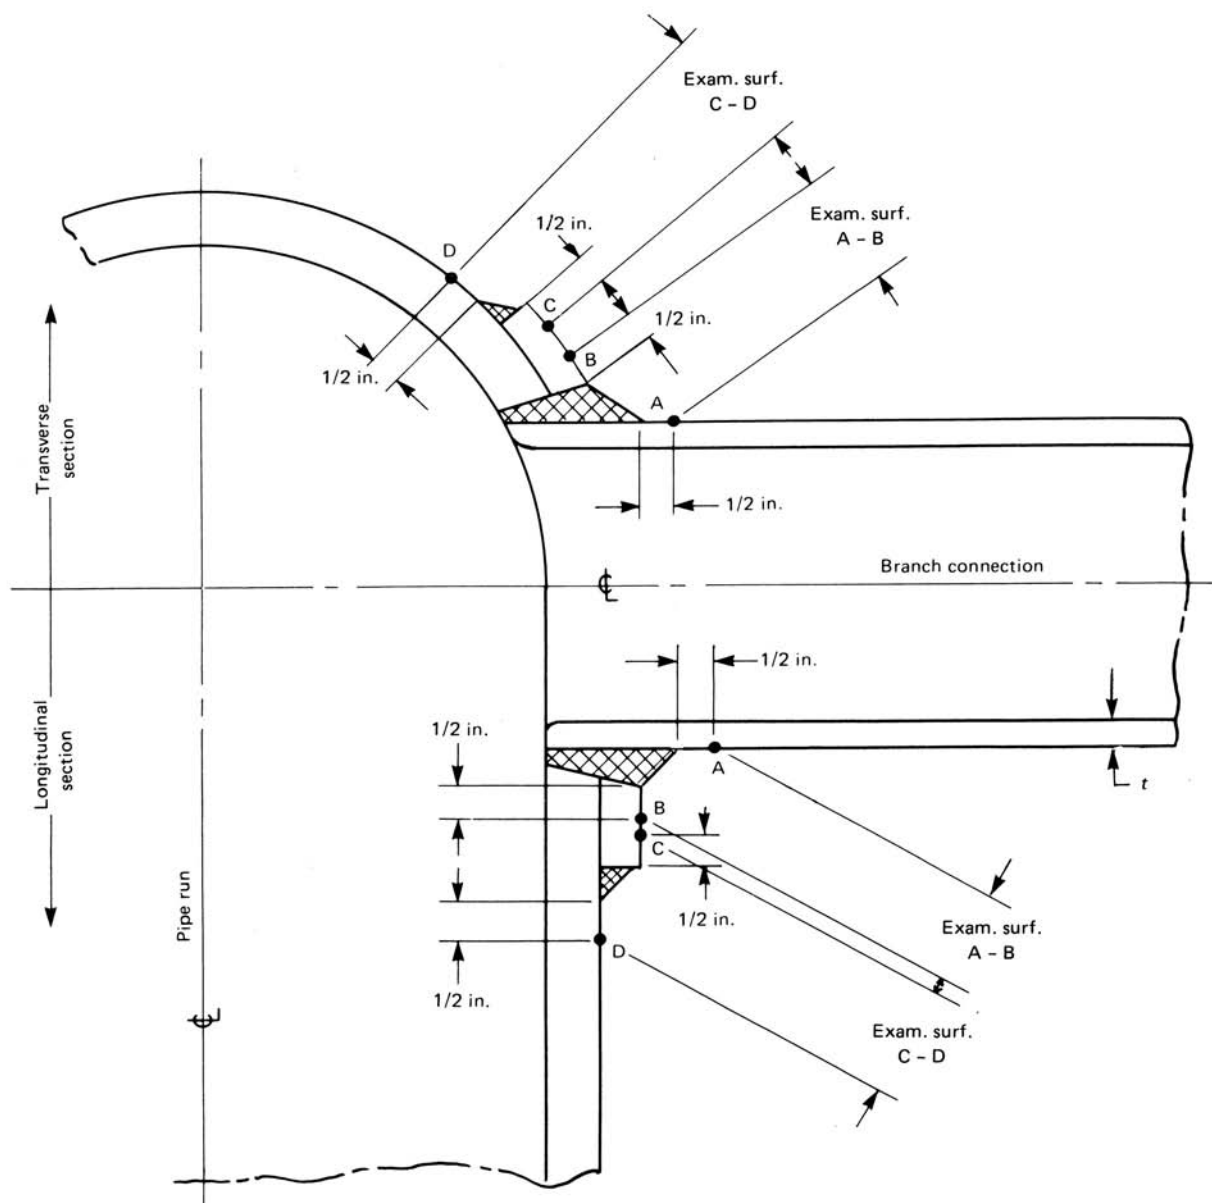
PIPE BRANCH CONNECTION
